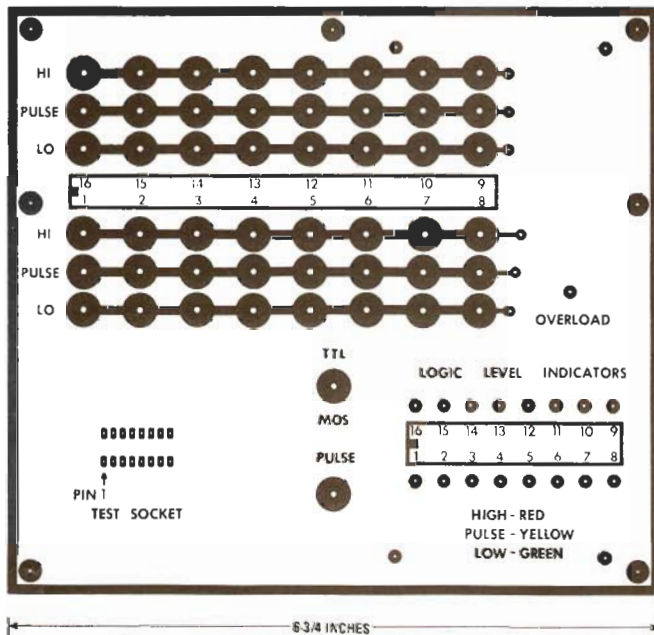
TOP OF PANEL BOARD. Drill out holes at large foil pads as described in text.
